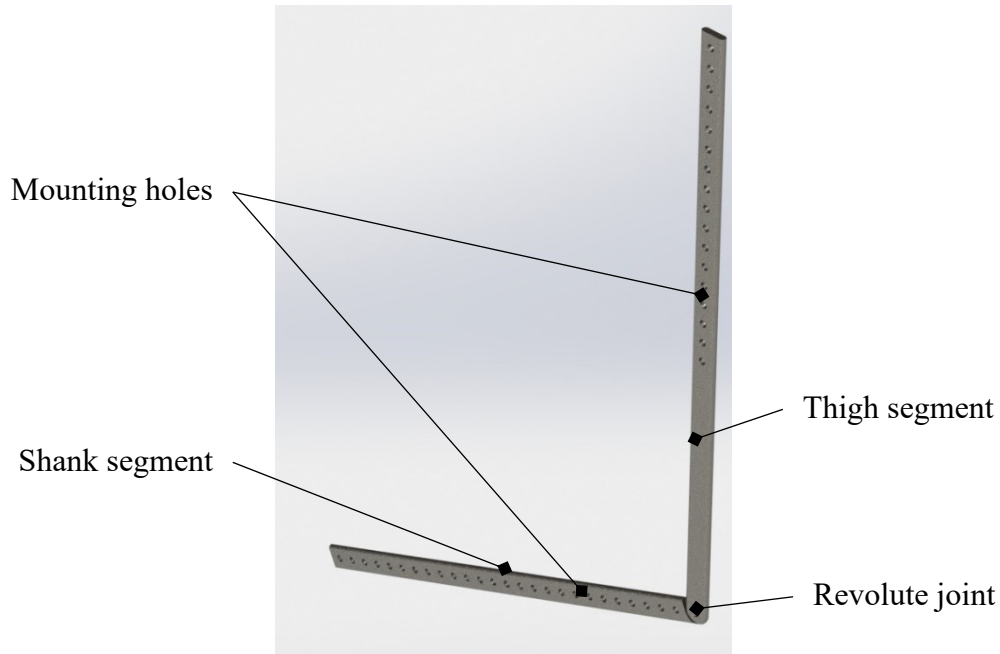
Brace frame showing the mounting holes and revolute joint.
